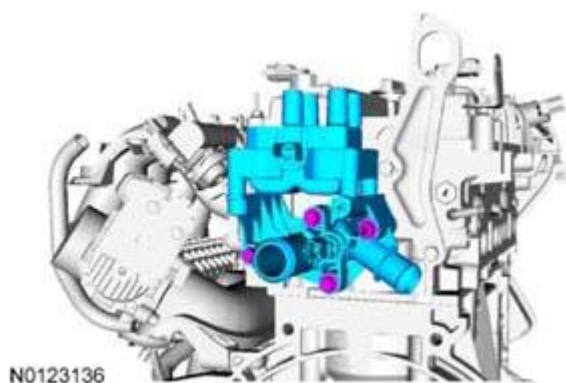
Identifying Coolant Outlet And Ignition Coil Assembly Bolts
